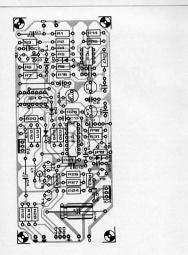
Track layout and component overlay of the printed circuit board for building the MacroVision decoder/blanker.
